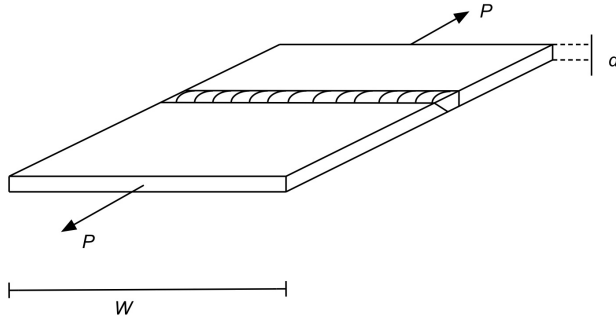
Loading perpendicular to the weld. Based on the ideas of Myhr et al. [49].
